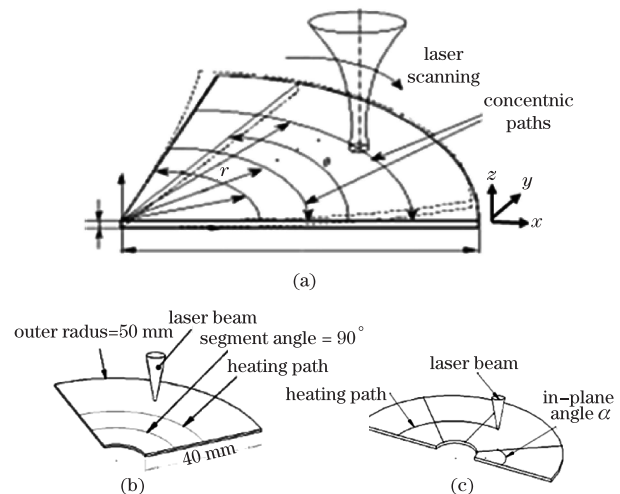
Definition of circular part geometries, segment angle β , and in-plane angle α while concentric paths describe the heating path radius r_i . (a) Circle-shaped specimen, $\beta = 90^\circ$; (b) ring-shaped specimen, $\beta = 90^\circ$; (c) ring-shaped specimen, $\beta = 180^\circ$.
